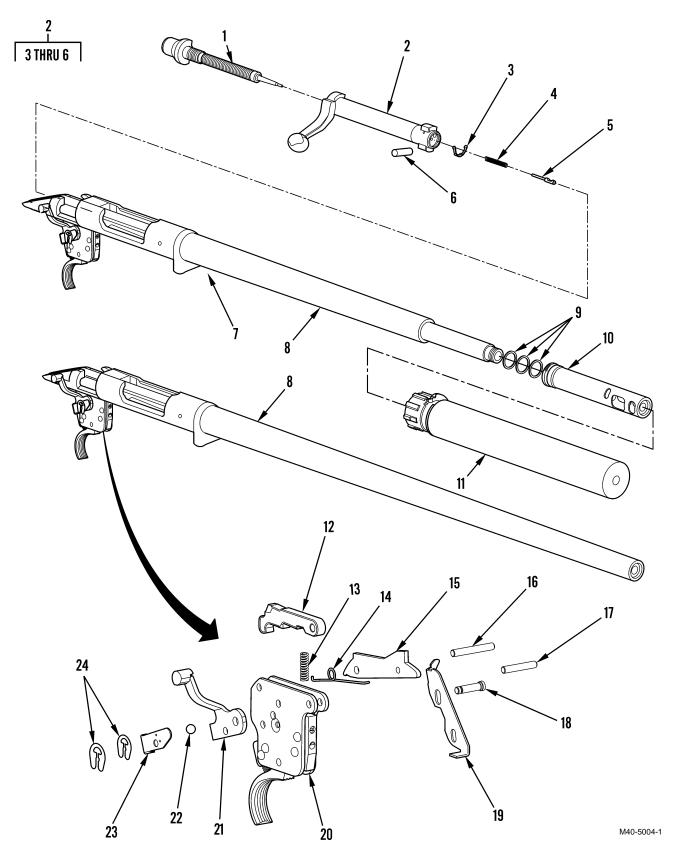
Bolt, Barrel, and Receiver with Trigger Assembly, Muzzle Brake, and Suppressor
